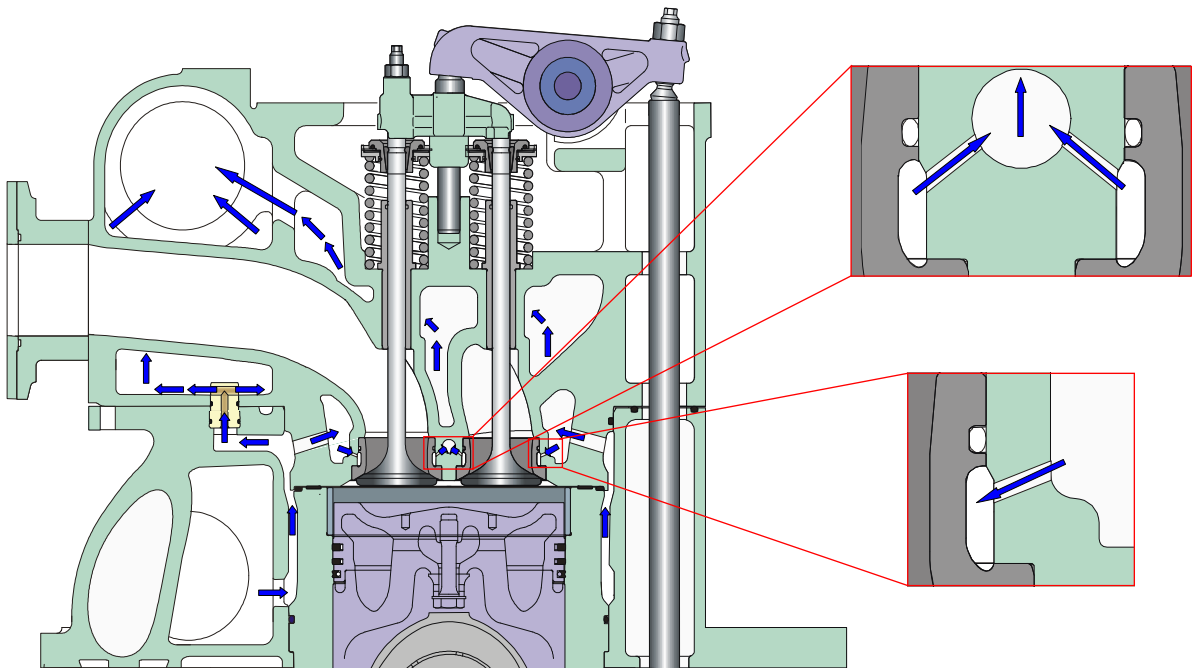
The cooling water flow in cylinder head (실린더 헤드내의 냉각수의 흐름)
